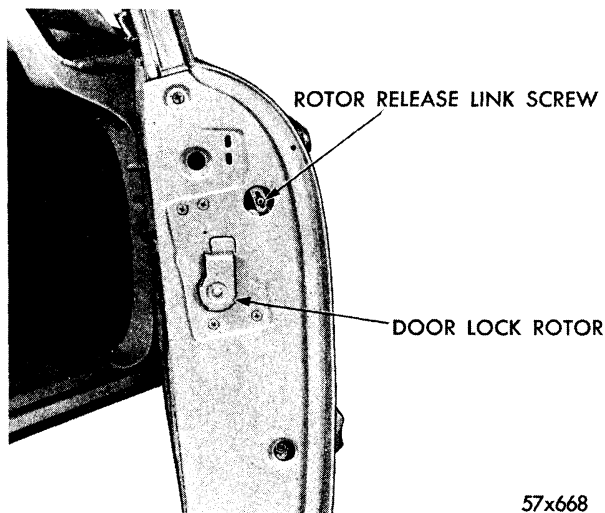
Door Lock Rotor Release Link Adjusting Screw
